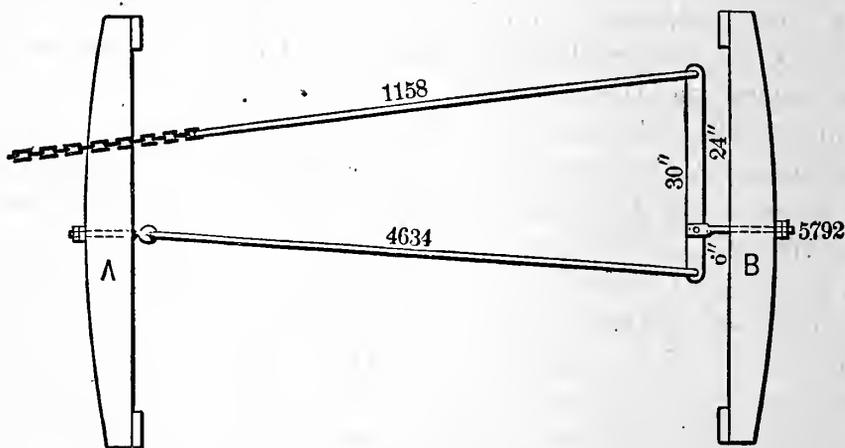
SKETCH OF MECHANISM OF HAND-BRAKE.
